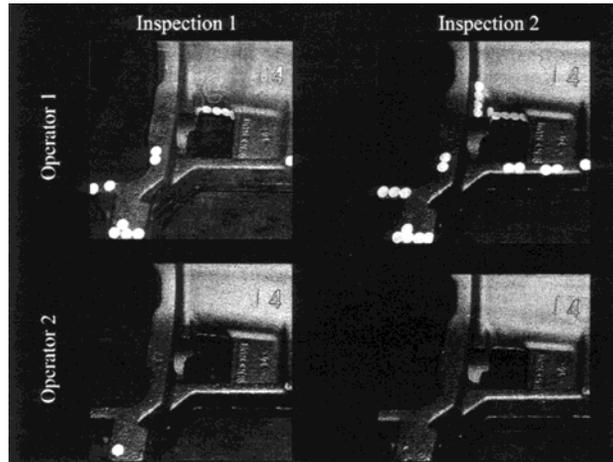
Pictures of defects marked on a specified location on one casting four different times. Two inspectors each inspected the same part twice.
